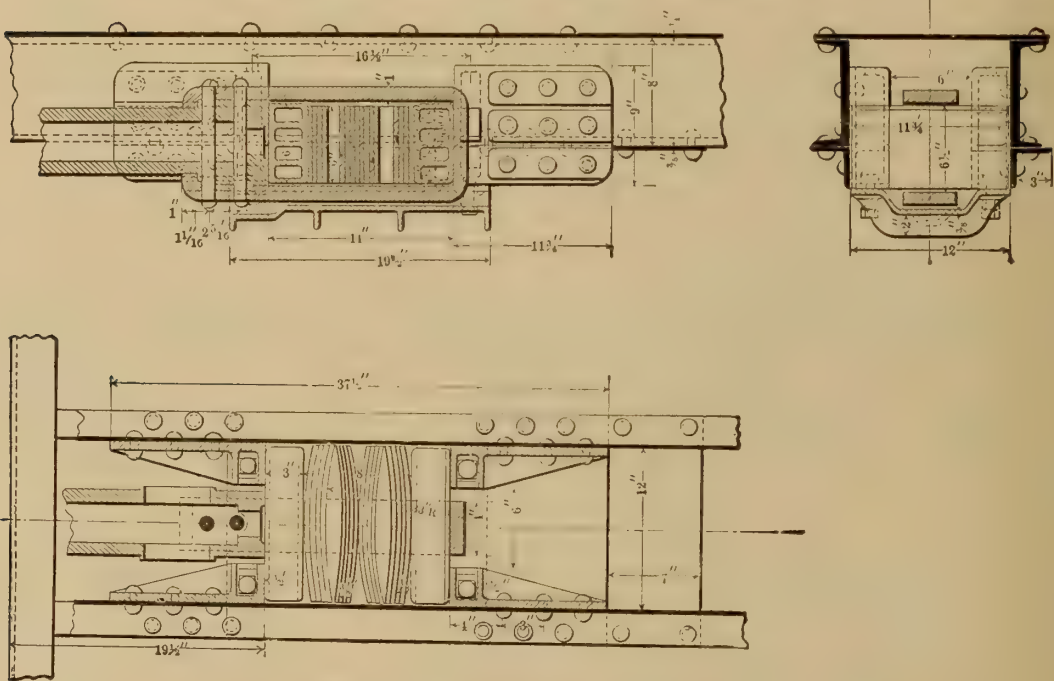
MINER DRAFT GEAR APPLIED TO 80,000 LB. GONDOLA CAR. MO. PAC.
